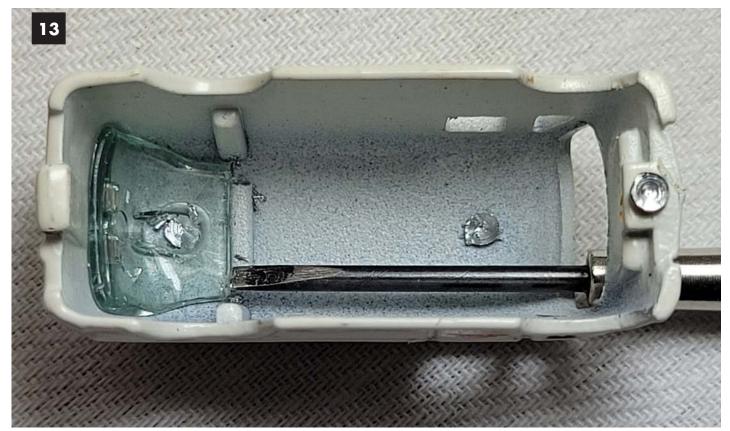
Gently pry the glass off the rivets. If it doesn't want to come off drill the rivets a little more. If you're going to paint
